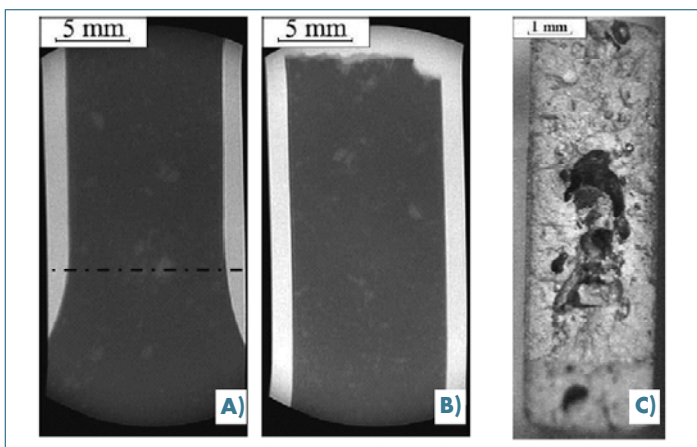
X-ray images of a tensile bar (a) before and (b) after testing; (c) fracture surface. The line in (a) represents the fracture path in the specimen. Defects were detectable by X-ray inspection.
